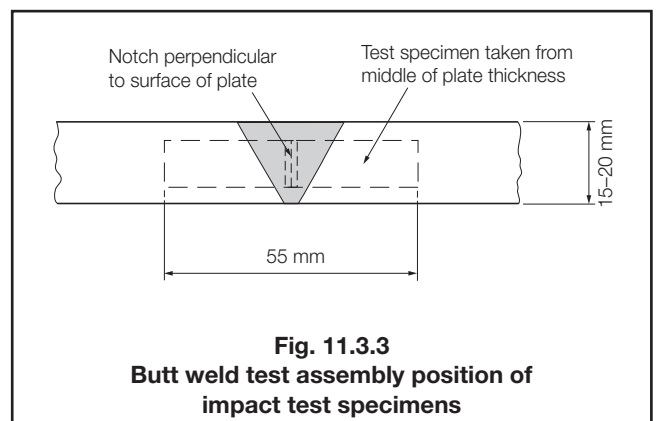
Butt weld test assembly position of impact test specimens
